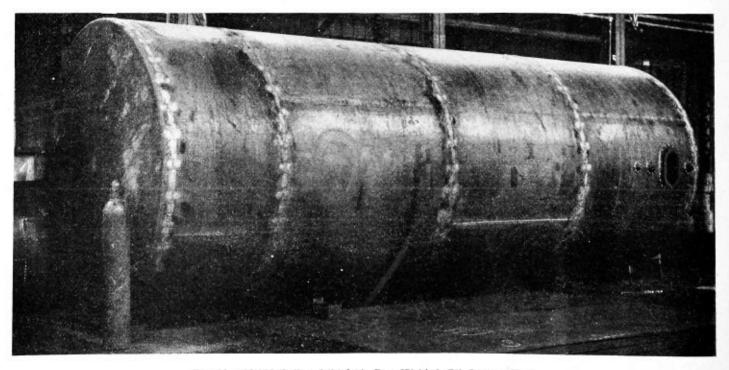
12,000-Gallon 5/16-Inch Butt Welded Oil Storage Tank
